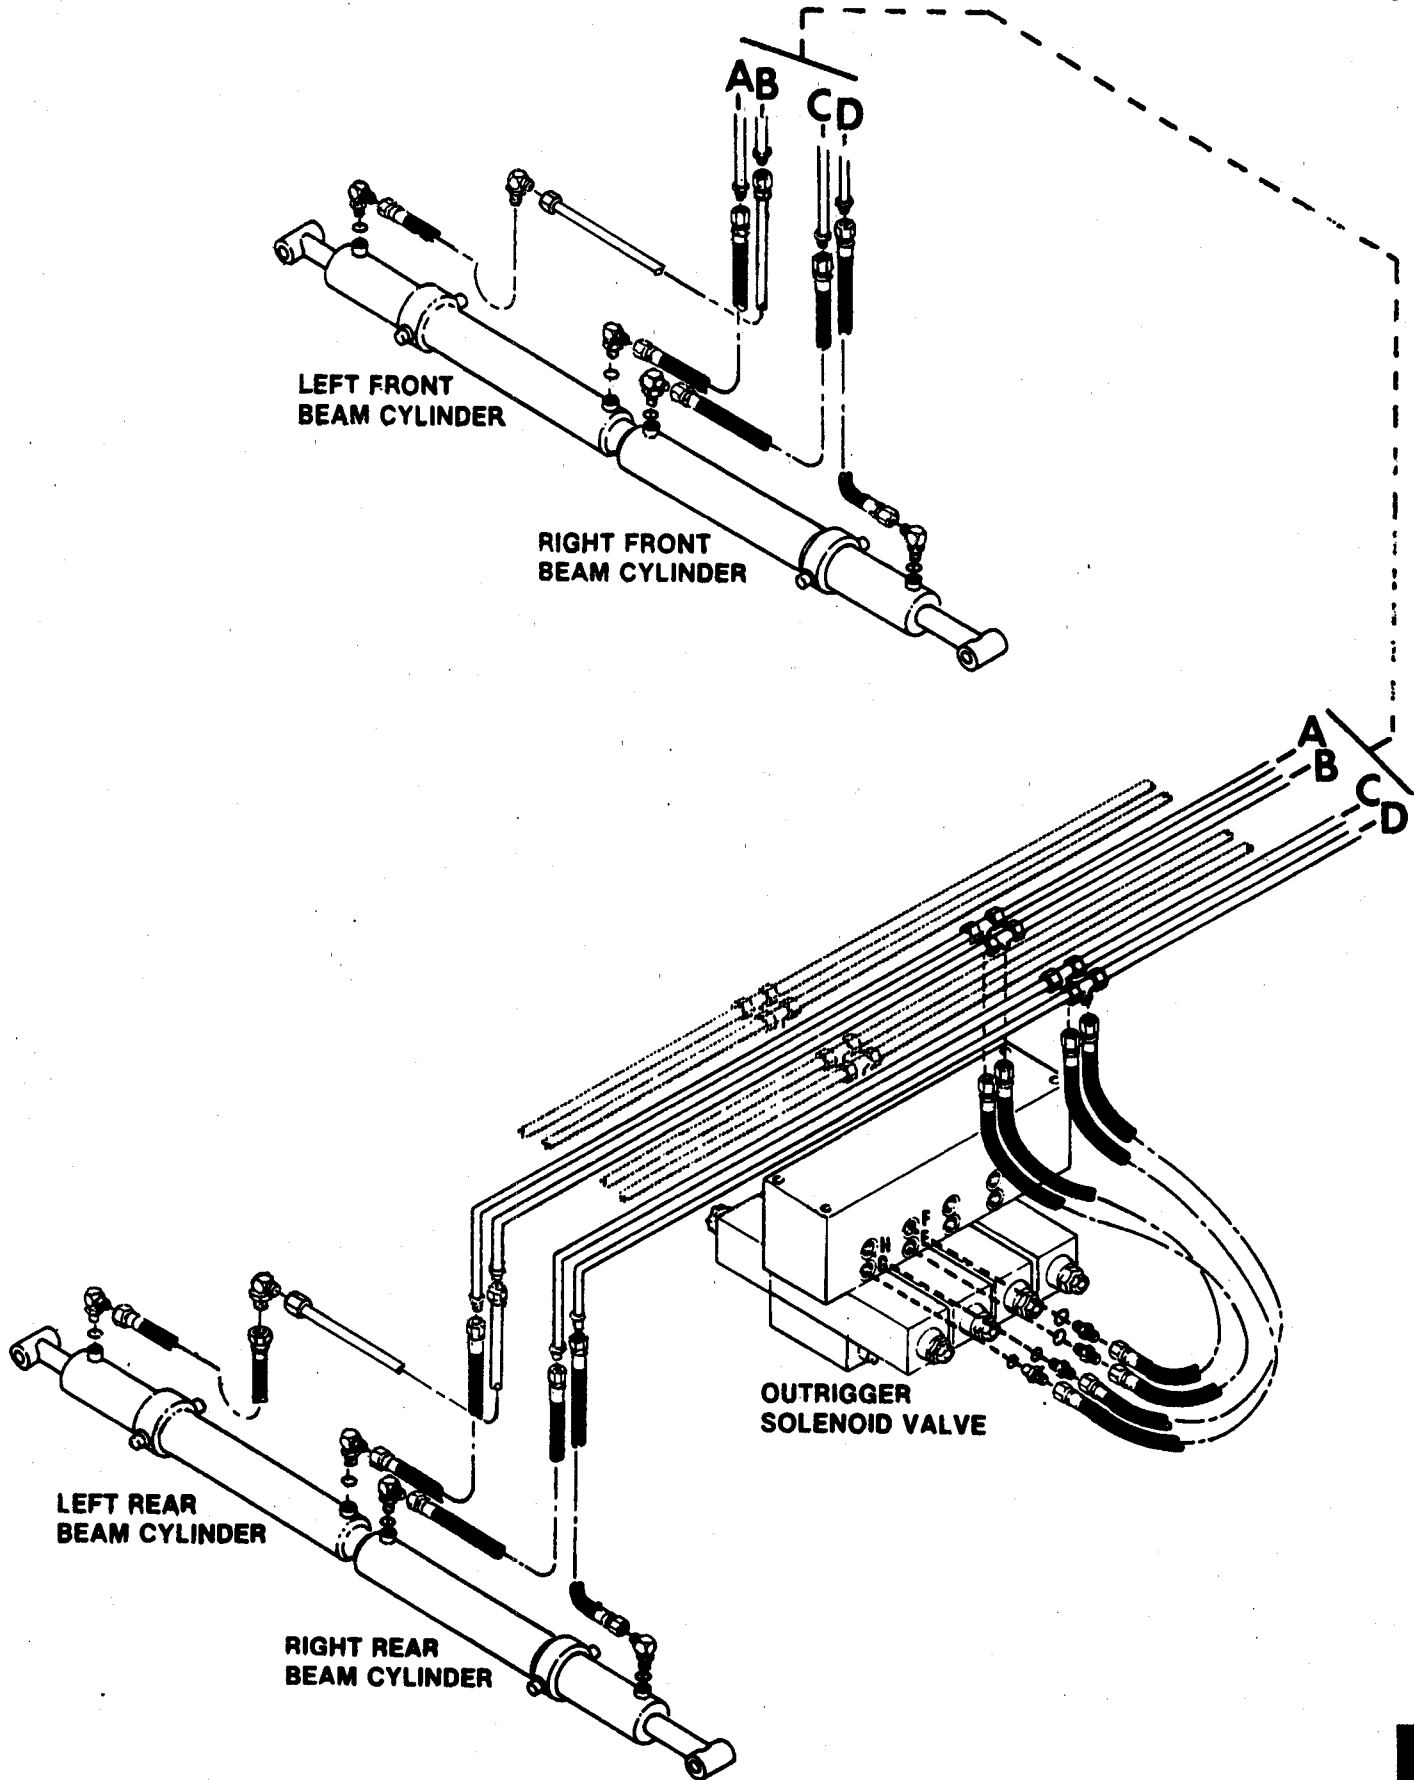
Outrigger Hydraulic Lines — Out/In — Outrigger Valve to Beam Cylinders
